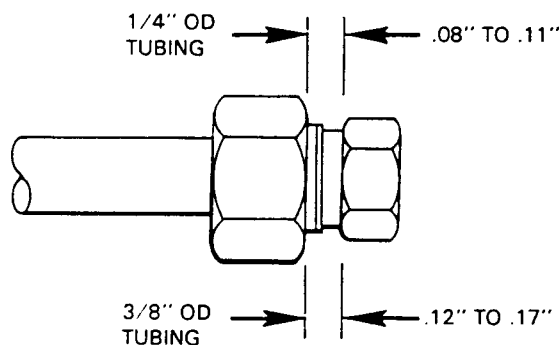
Tolerances, Union Nut and Tubing Nut
